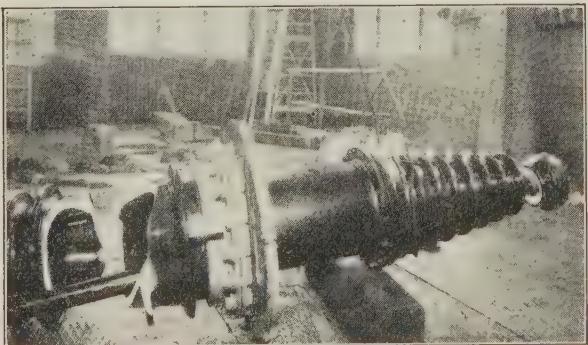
BUSHING FROM POLE NO. 3 OF 136B BREAKER AFTER TEST NO. 35. NOTE BREAK AT LOWER END
